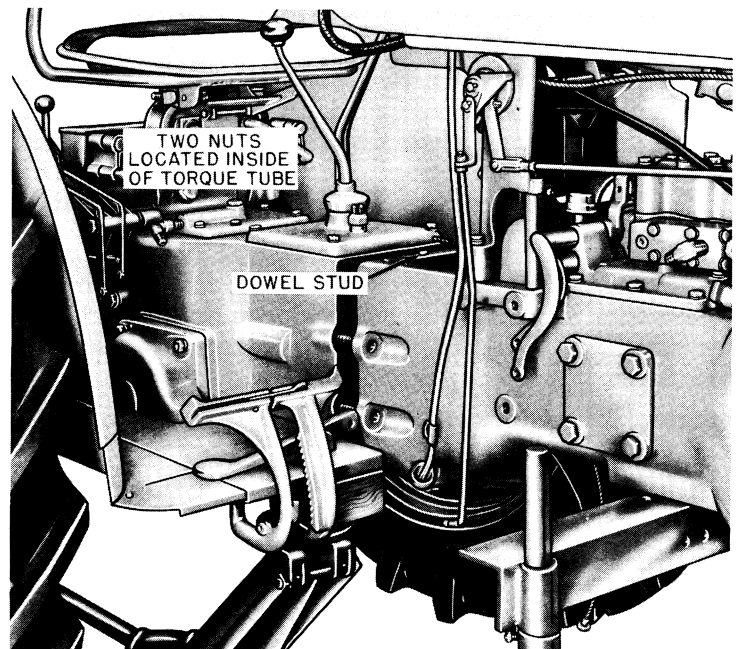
Assembling Transmission to Torque Tube - Right Hand View
